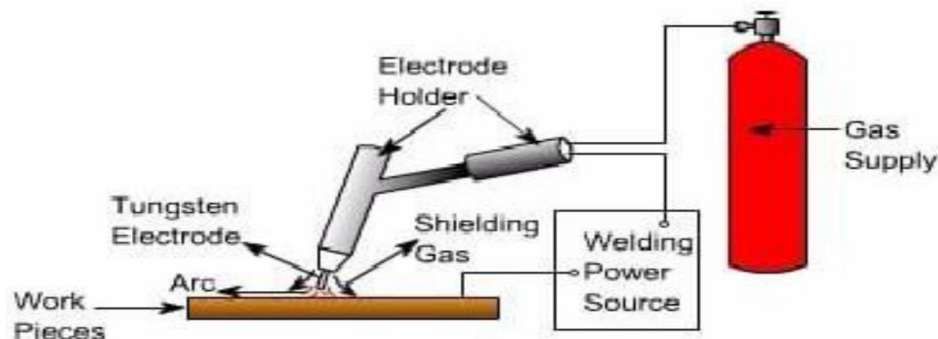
TIG welding A process of uniting two metals, with or without filler material, that are similar or dissimilar is welding. TIG welding, also referred to as standard Arc welding, is one of the widely used methods. This technique is employed because it has strong controlling qualities to locally deliver heat to the welding line [1]. By inducing coalescence, welding, one of the fabrication processes, is used to unite metals, taking the role of other joining techniques like bolting and riveting. TIG welding creates strong joints and is preferred by the majority of manufacturers for mechanical assembly. Even in TIG welding, filler material is typically employed in metal joining procedures. The most crucial factor is if the welded samples are approved. Non-destructive testing of these materials is done at different stages to gauge the quality of the welds in order to match their specifications and norms. Even though the appropriate precautions were taken throughout the welding process, the weld joint inspection found that it does not fulfil its standards owing to lack of penetration, under cuts, cracks, etc. Radiography, ultrasonic testing, and acoustic testing are a few of the non-destructive examination procedures. To identify the weldment faults, these tests can be carried out more easily. The majority of the time, these tests are performed on casting-produced goods. The majority of components today, including crucial forms and structures, are made via welding.
